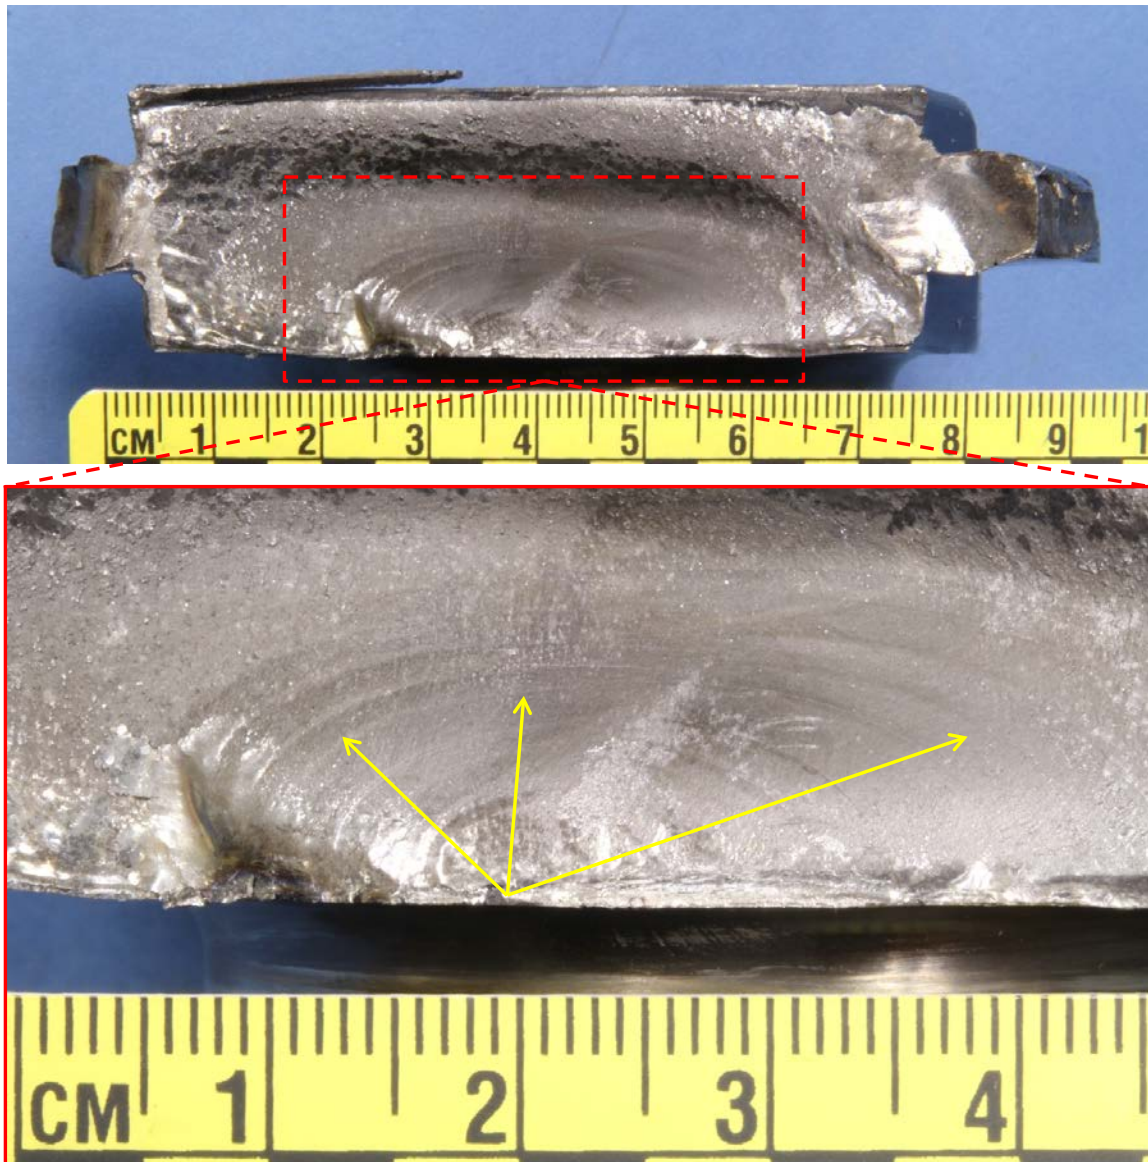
Close-up photos of the fracture surface of the crankshaft separation. The fracture surface had repeated crack arrest marks consistent with fatigue cracking. The fatigue cracking emanated from the connecting rod journal and propagated outward, as indicated by the yellow arrows.
